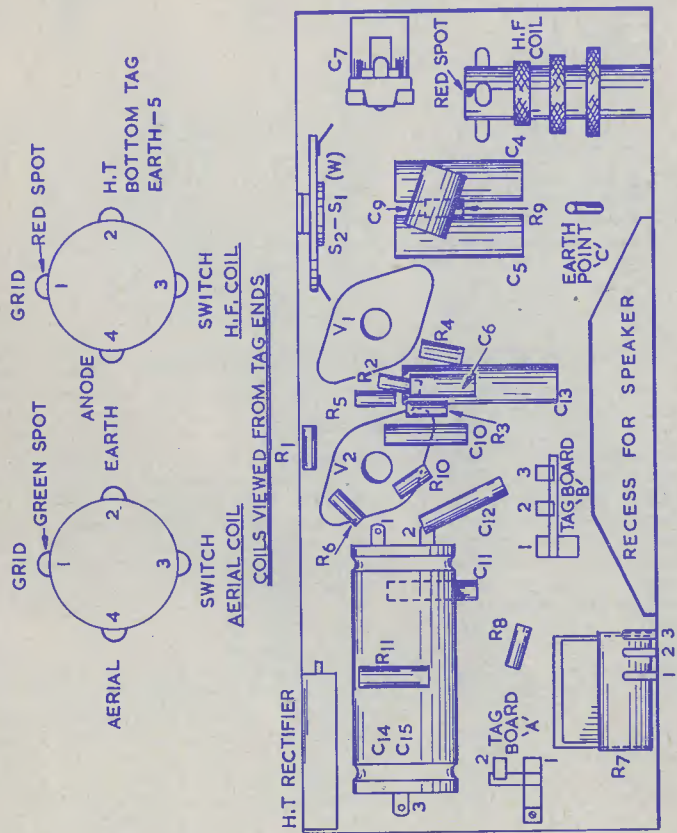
UNDERSIDE OF CHASSIS SHOWING COMPONENT LAYOUT
